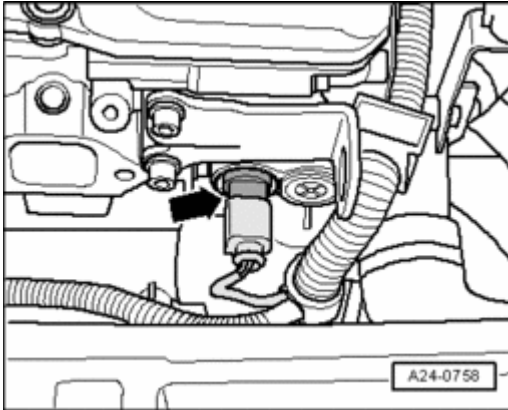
Removing Bolts And Actuator From Intake Manifold
